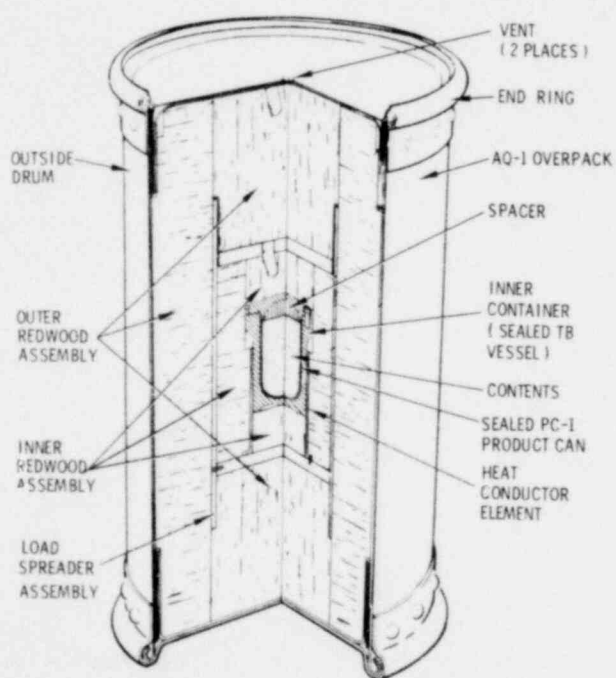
F-1. PAT-1 (Plutonium Air Transportable) Package Showing Load-Carrying End Ring
